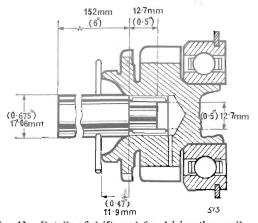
Details of drift used for driving the needle bearing into the pinion
